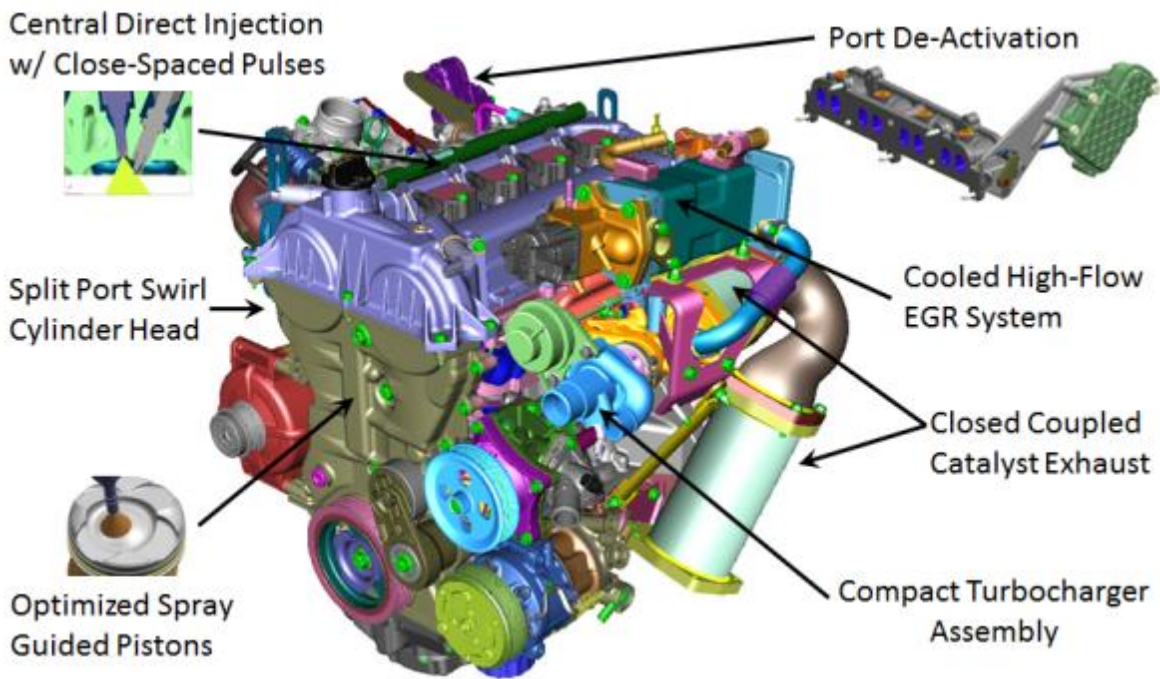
LBD Engine Assembly and Optimized Lean Combustion Enabling Features
